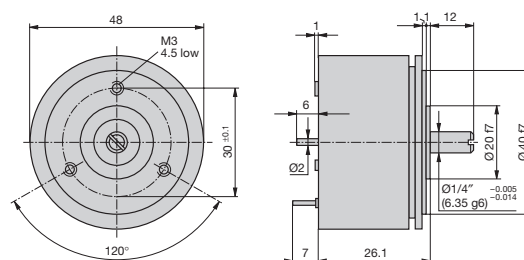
KINAX 3W2 with special drive shaft at front and at rear.
